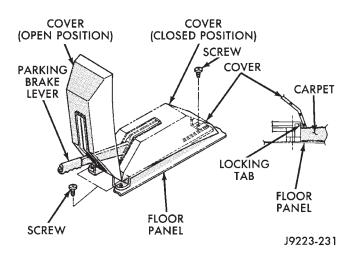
Parking Brake Lever Removal/Installation FRONT CARPET/MAT—XJ VEHICLES
